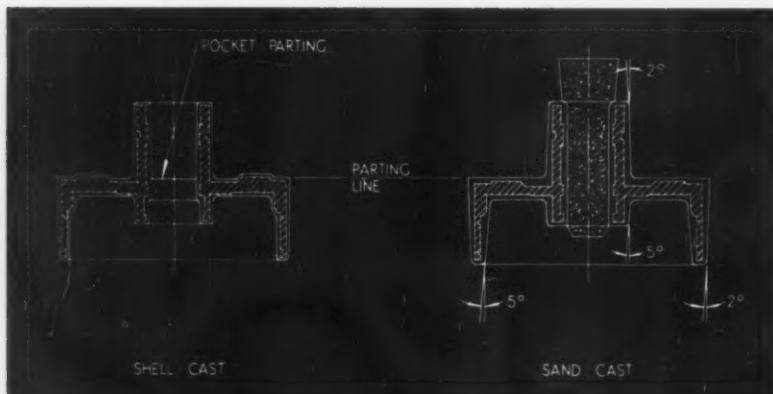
Shell mold (left) requires no core for center of hub. Accuracy in shell mold permits reduction of finish stock from 0.09 to 0.06 in.
